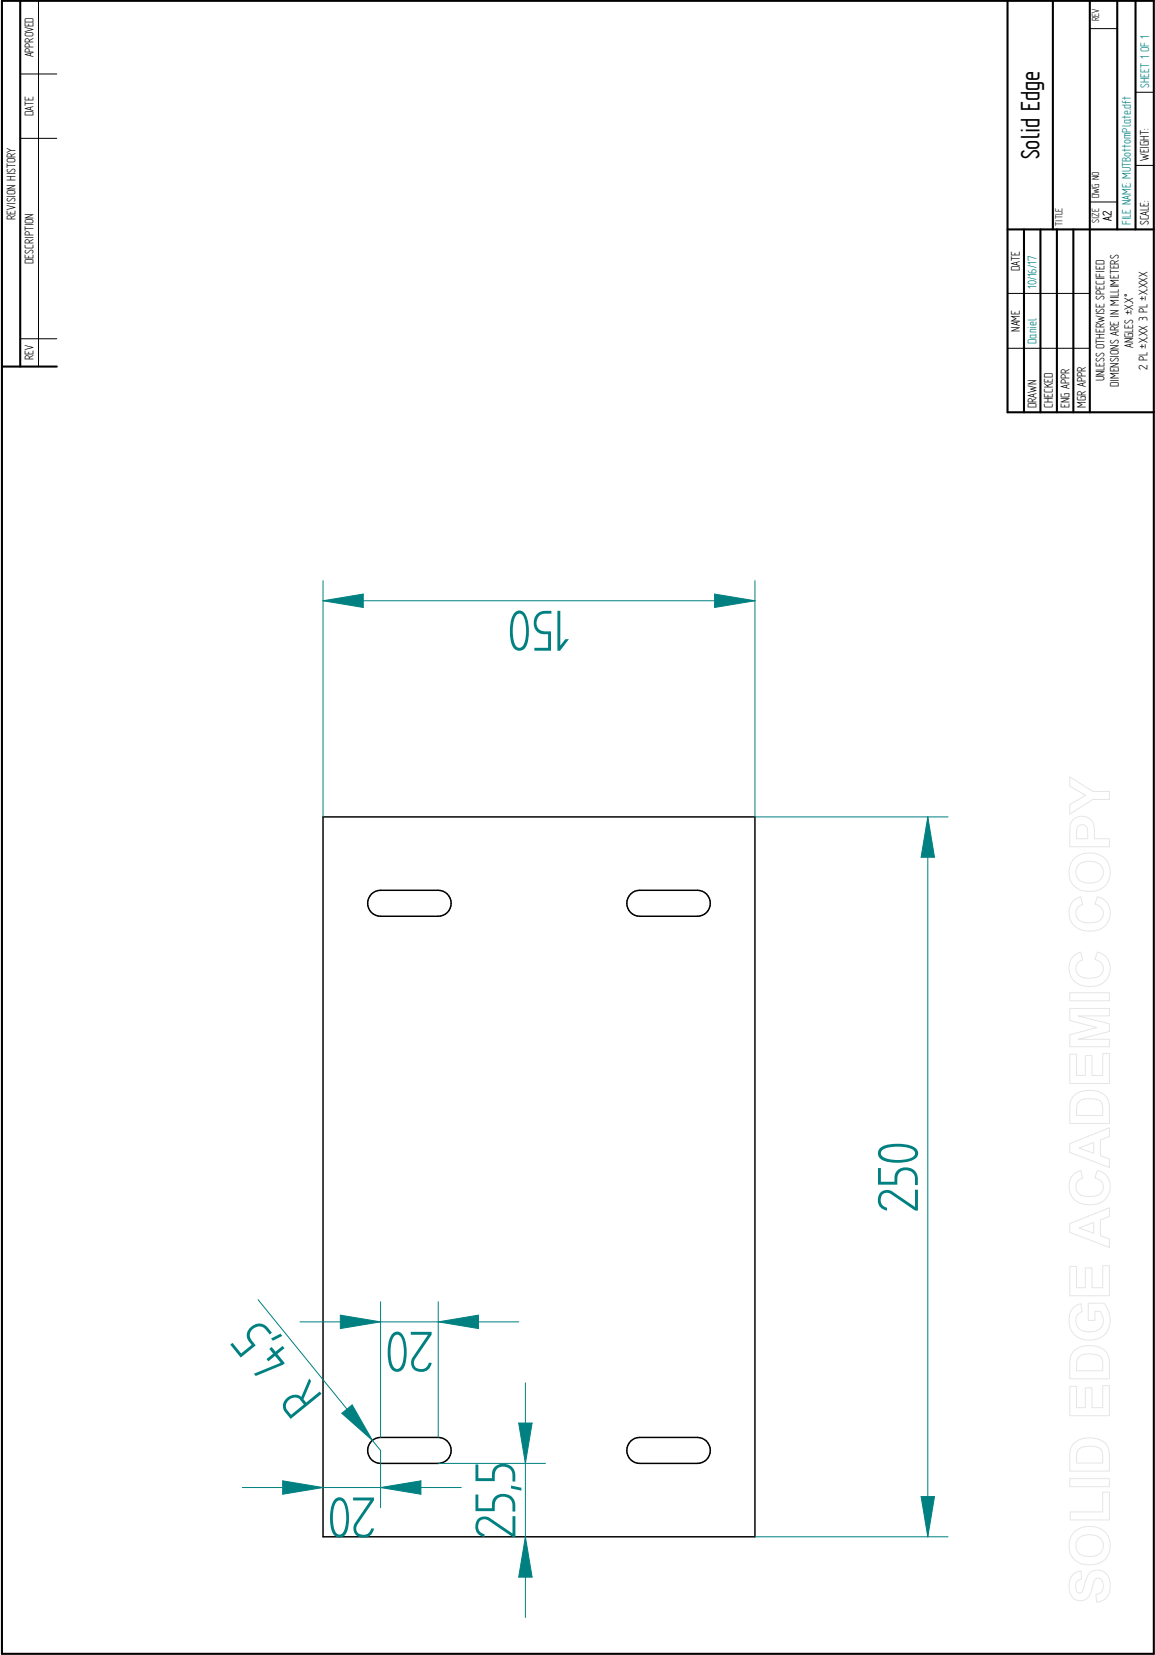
Drawing of the bottom plate of the MUT mount where the mount is fastened to the rails.
